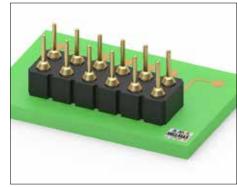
MM 429 series with 2956-0 pins soldered into blind via holes on PCB for stability.
